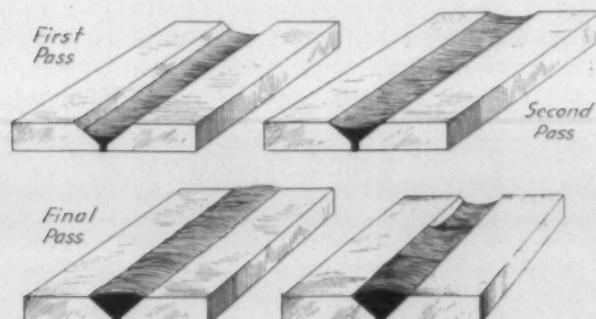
These sketches show the proper contours for successive passes in bronze-welding $\frac{1}{2}$ -inch thick cast iron. The sketch at the lower right is a composite view of the three passes. Note that all passes except the final one have concave top surfaces.
